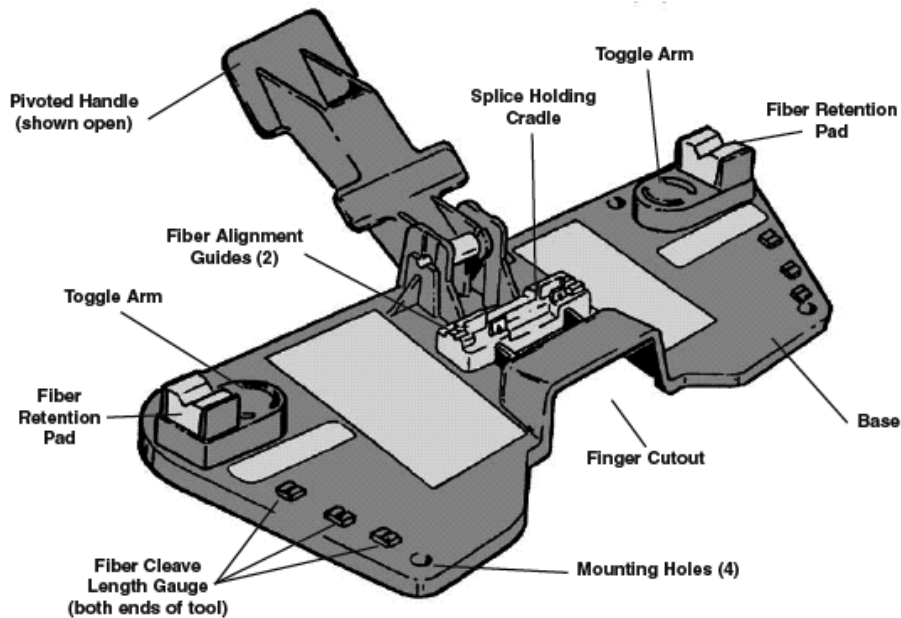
3M™ Fibrlok™ Assembly Tool 2501
